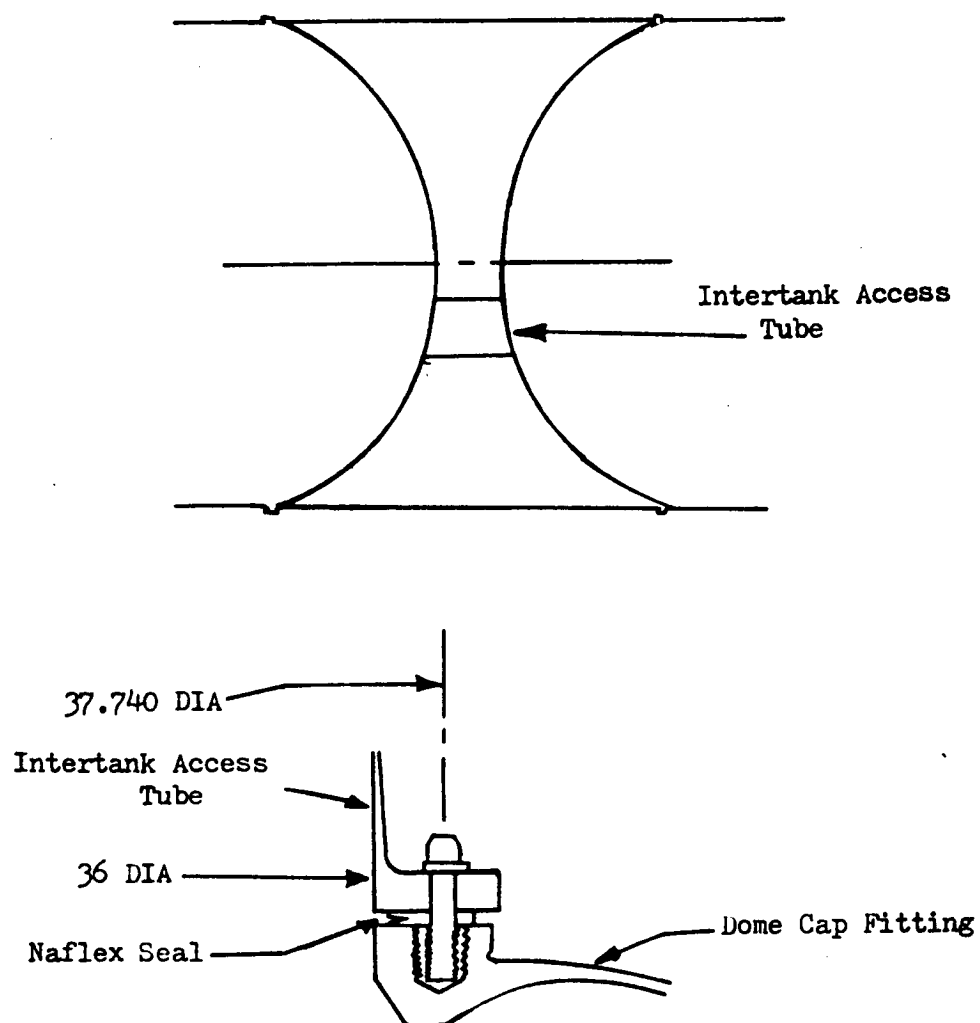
Intertank Access Tube Attachment to Existing Manhole Flange
